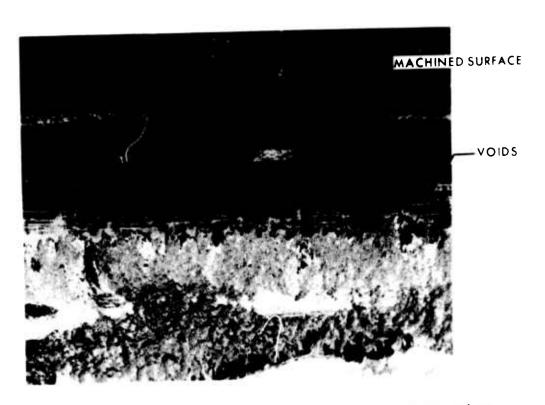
Machined Diameter - Fractured Section - Second-Row Pinion.
